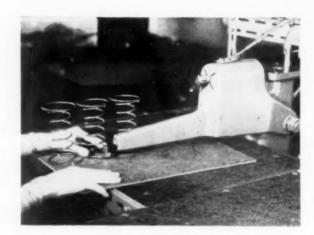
A metal stitching machine is shown fastening automobile seat coils to a Masonite panel.
